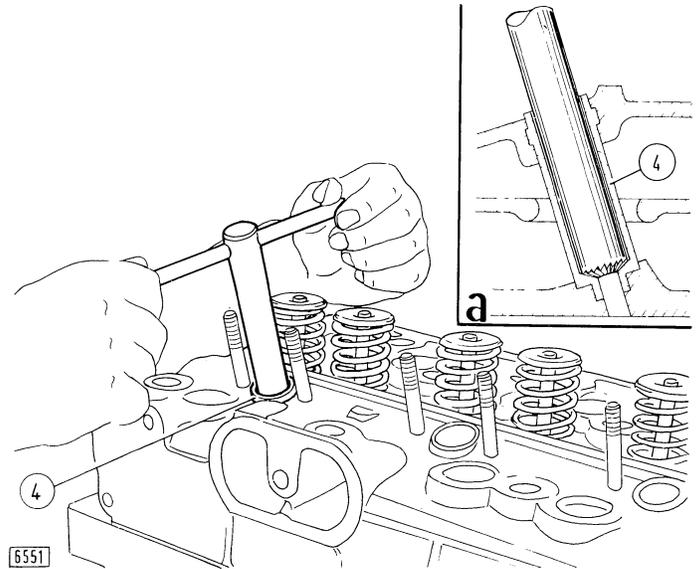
Fuel Injector Sleeve Recutting Using End Cutter Part No. 291467
